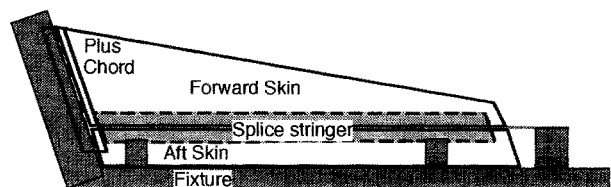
Method of assembling skin subassembly using a fixture. It supports and aligns all of the parts by means of various surfaces and appendages, some of which are shown realistically while others are shown schematically.
